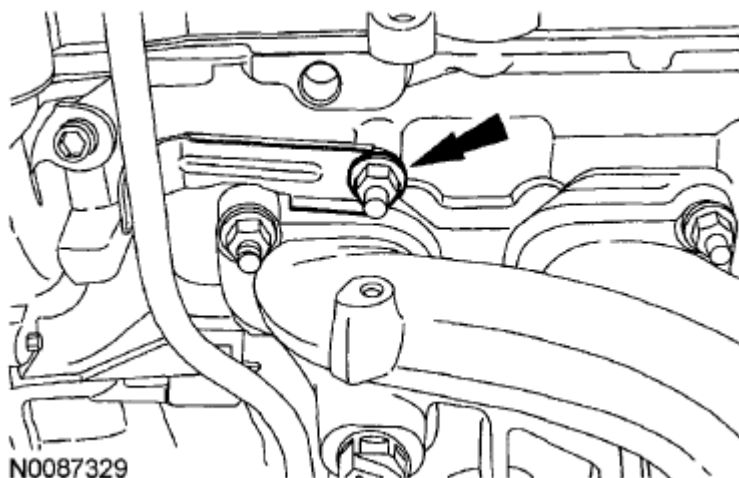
Locating Oil Level Indicator And Stud Bolt
